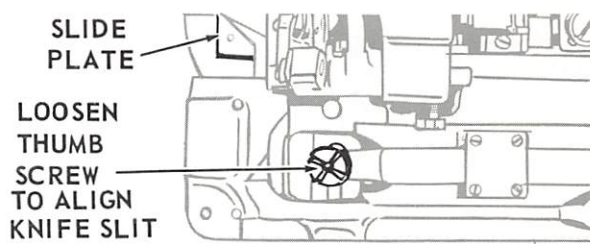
Clamp Carrier Slide Plate Thumb Screw
